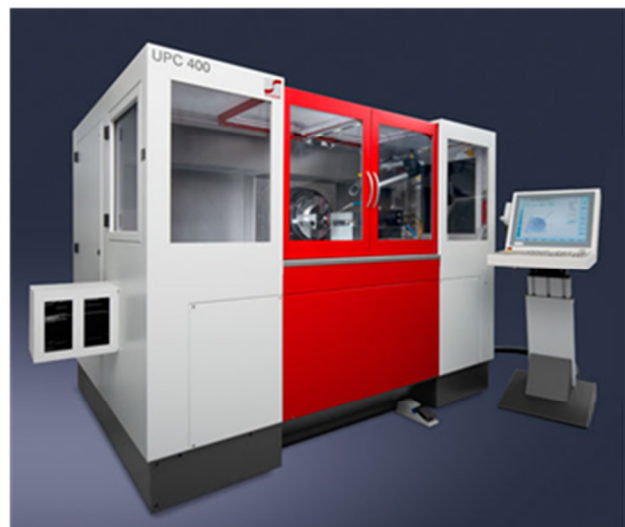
UPC 400 integrates diamond turning, milling, and metrology onto a single machining platform.
